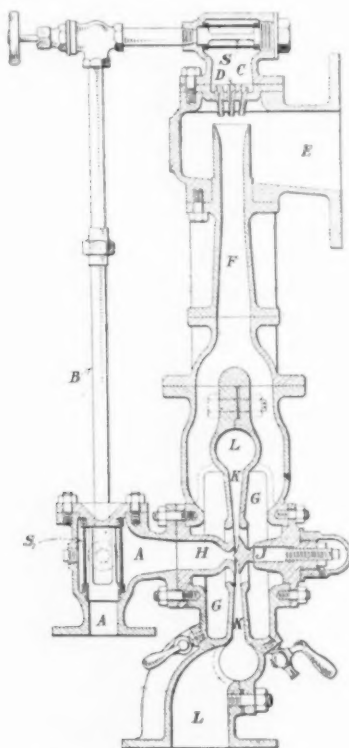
SECTIONAL VIEW OF RADOJET AIR PUMP
